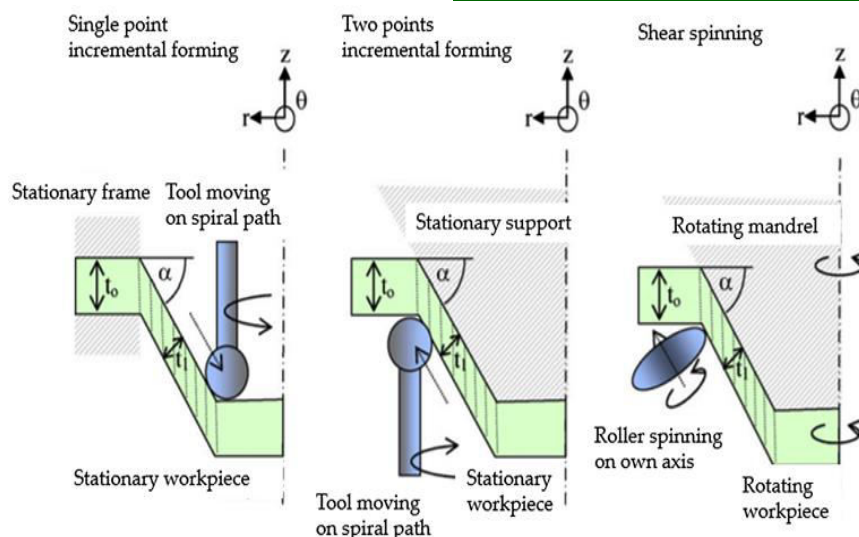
Incremental sheet forming schematics using variable tooling configurations [42].
